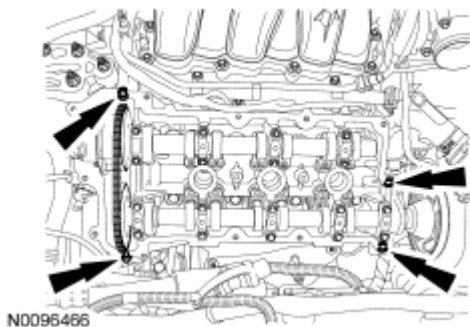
Locating Valve Cover With Bolts & Stud Bolts
